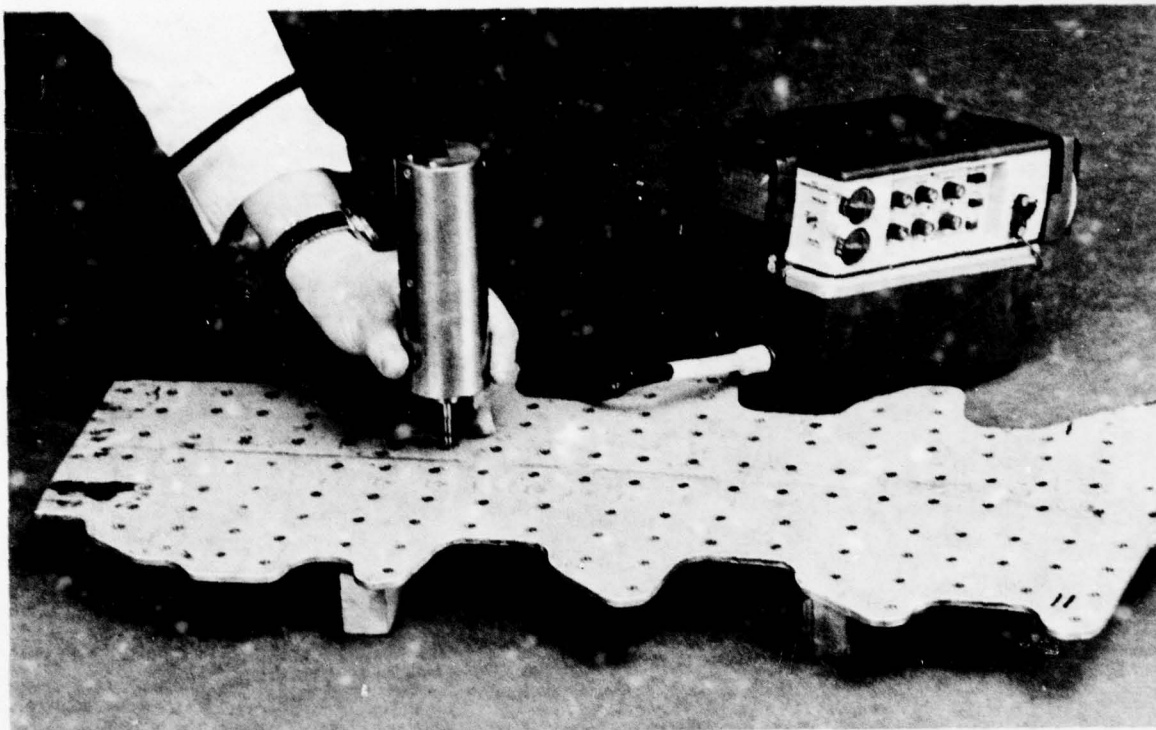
Eddy Current Probe Inspection for Cracks in Fastener Holes
